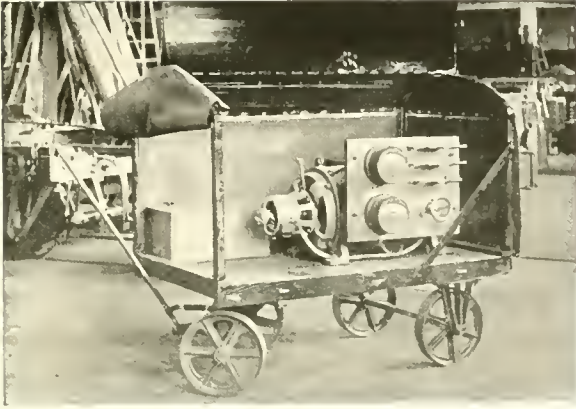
Lincoln Arc Welder (Portable Type) with canvas housing as used in engine house on Eastern Railroad. The canvas houses out the dust and dirt prevalent around the engine house.
